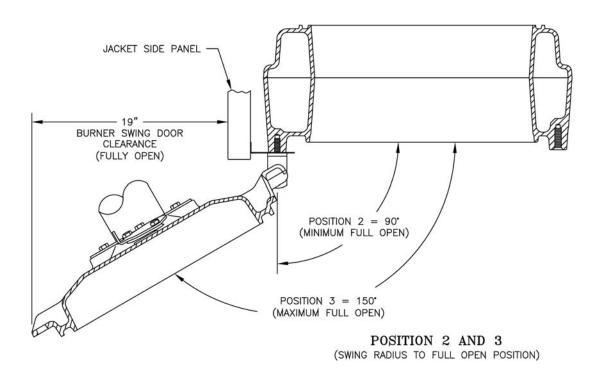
B: Top View - Burner Swing Door Mounted to Cast Iron Block Assembly (Jacket Removed for Clarity)
